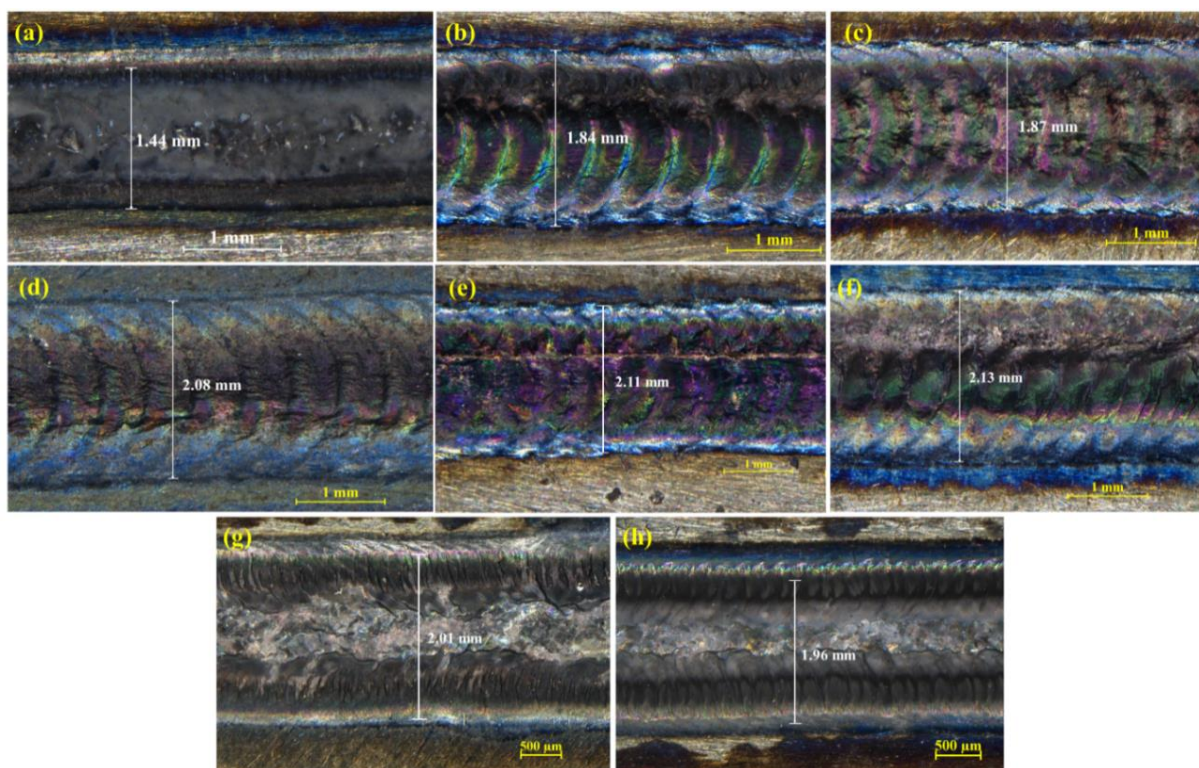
Top surface weld bead profile of (a) CC (b) PC1 (c) PC2 (d) PC3 (e) PC4 (f) PC5 (g) PC6 and (h) PC7 welding condition
